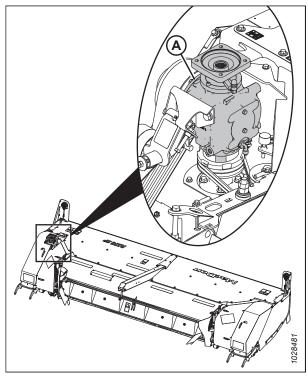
Header Drive Gearbox Location – Header with Conditioner Shown
